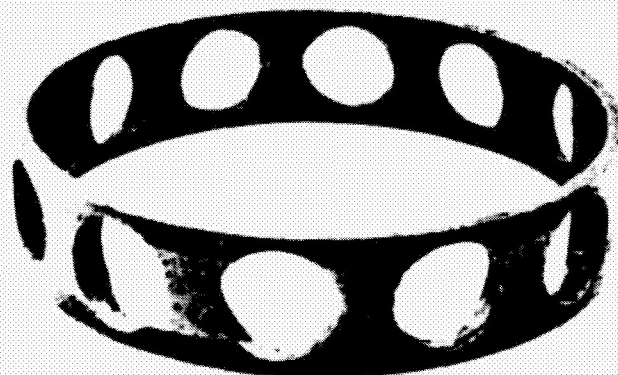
Posttest Appearance of Irradiated PBI-Glass Ball-Retainer After 7.75 hr Testing, Showing Inner-Surface and Ball-Pocket Scars
